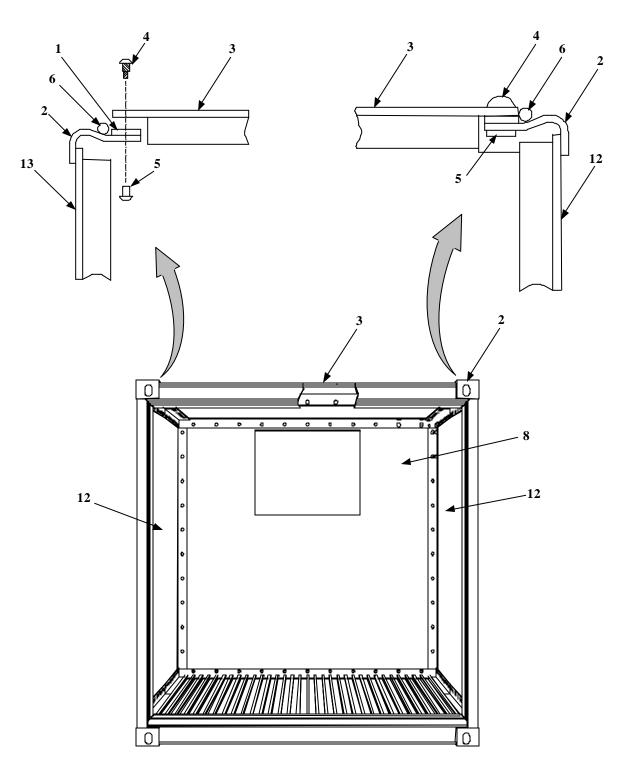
Roof Panel Installation (Sheet 1 of 2)
